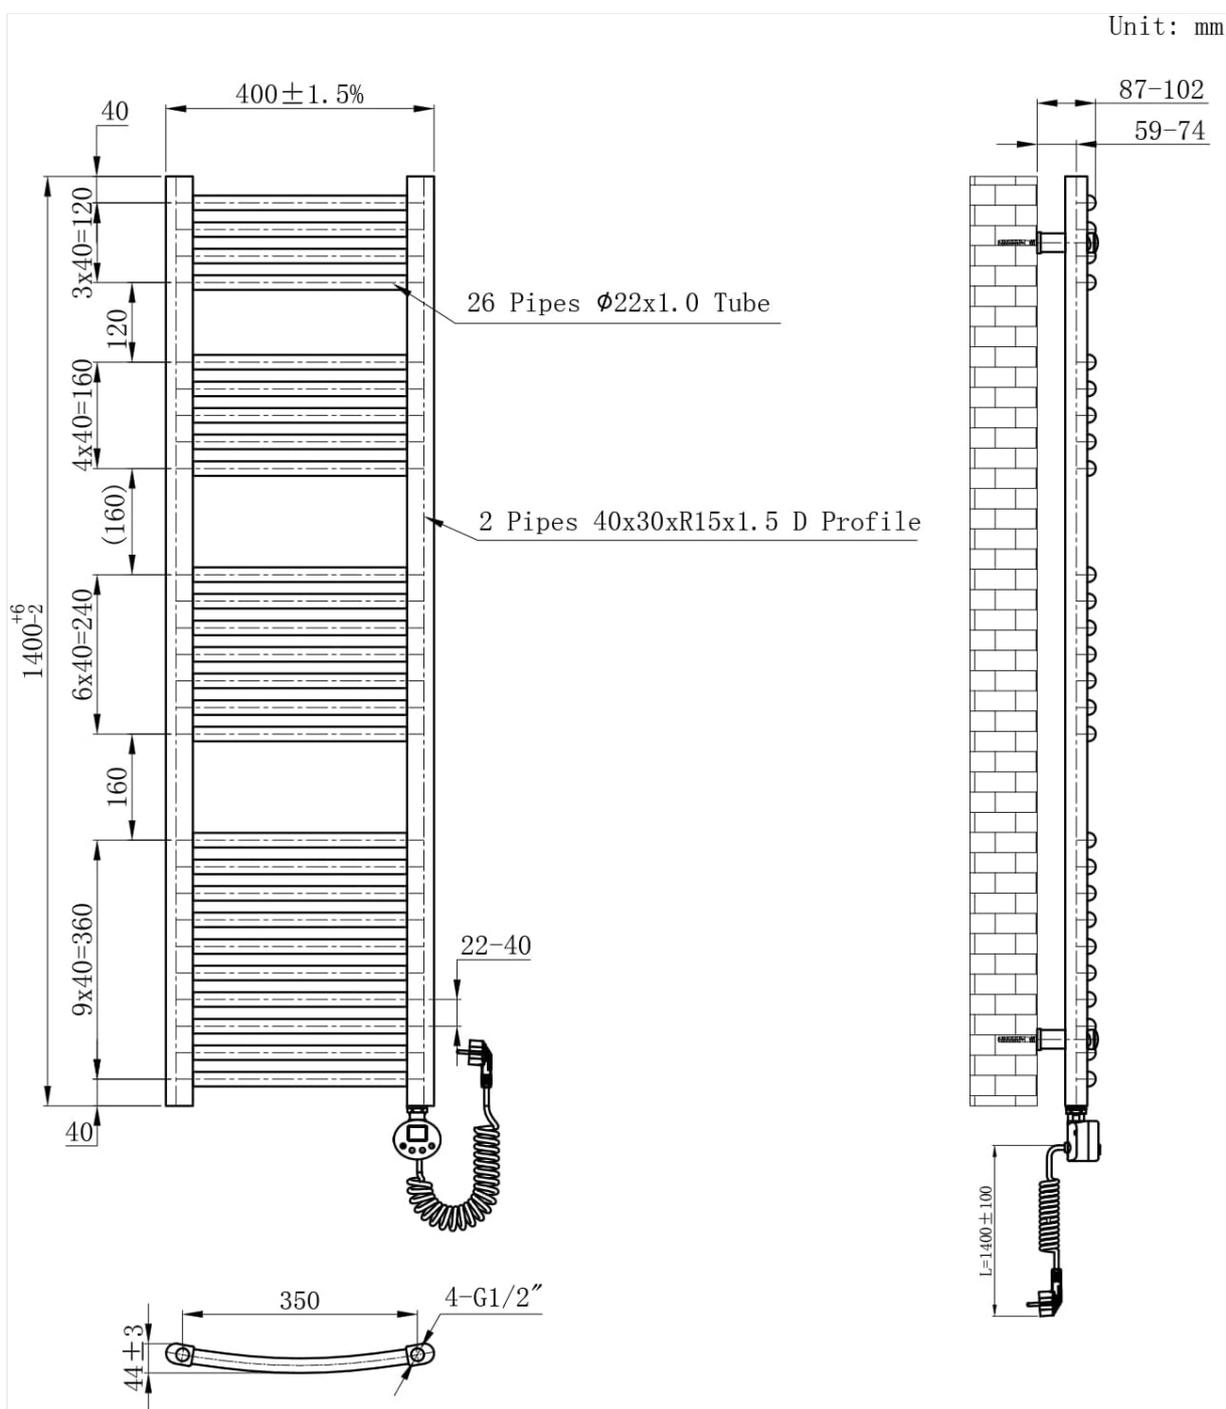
Dimensional drawing for installation. This diagram provides precise measurements for the radiator (1400x400mm) and
